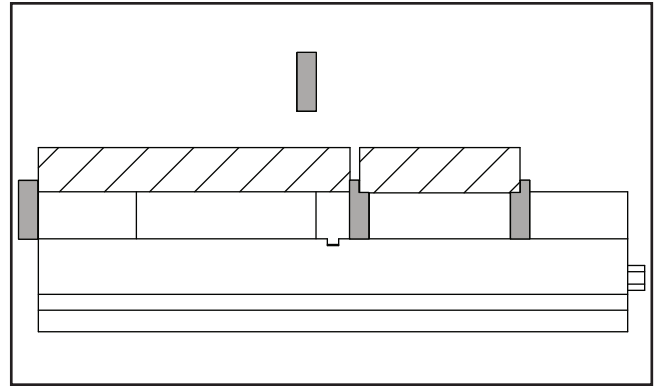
Clamping thin workpieces of different sizes with ridged jaw plates (sold separately).
